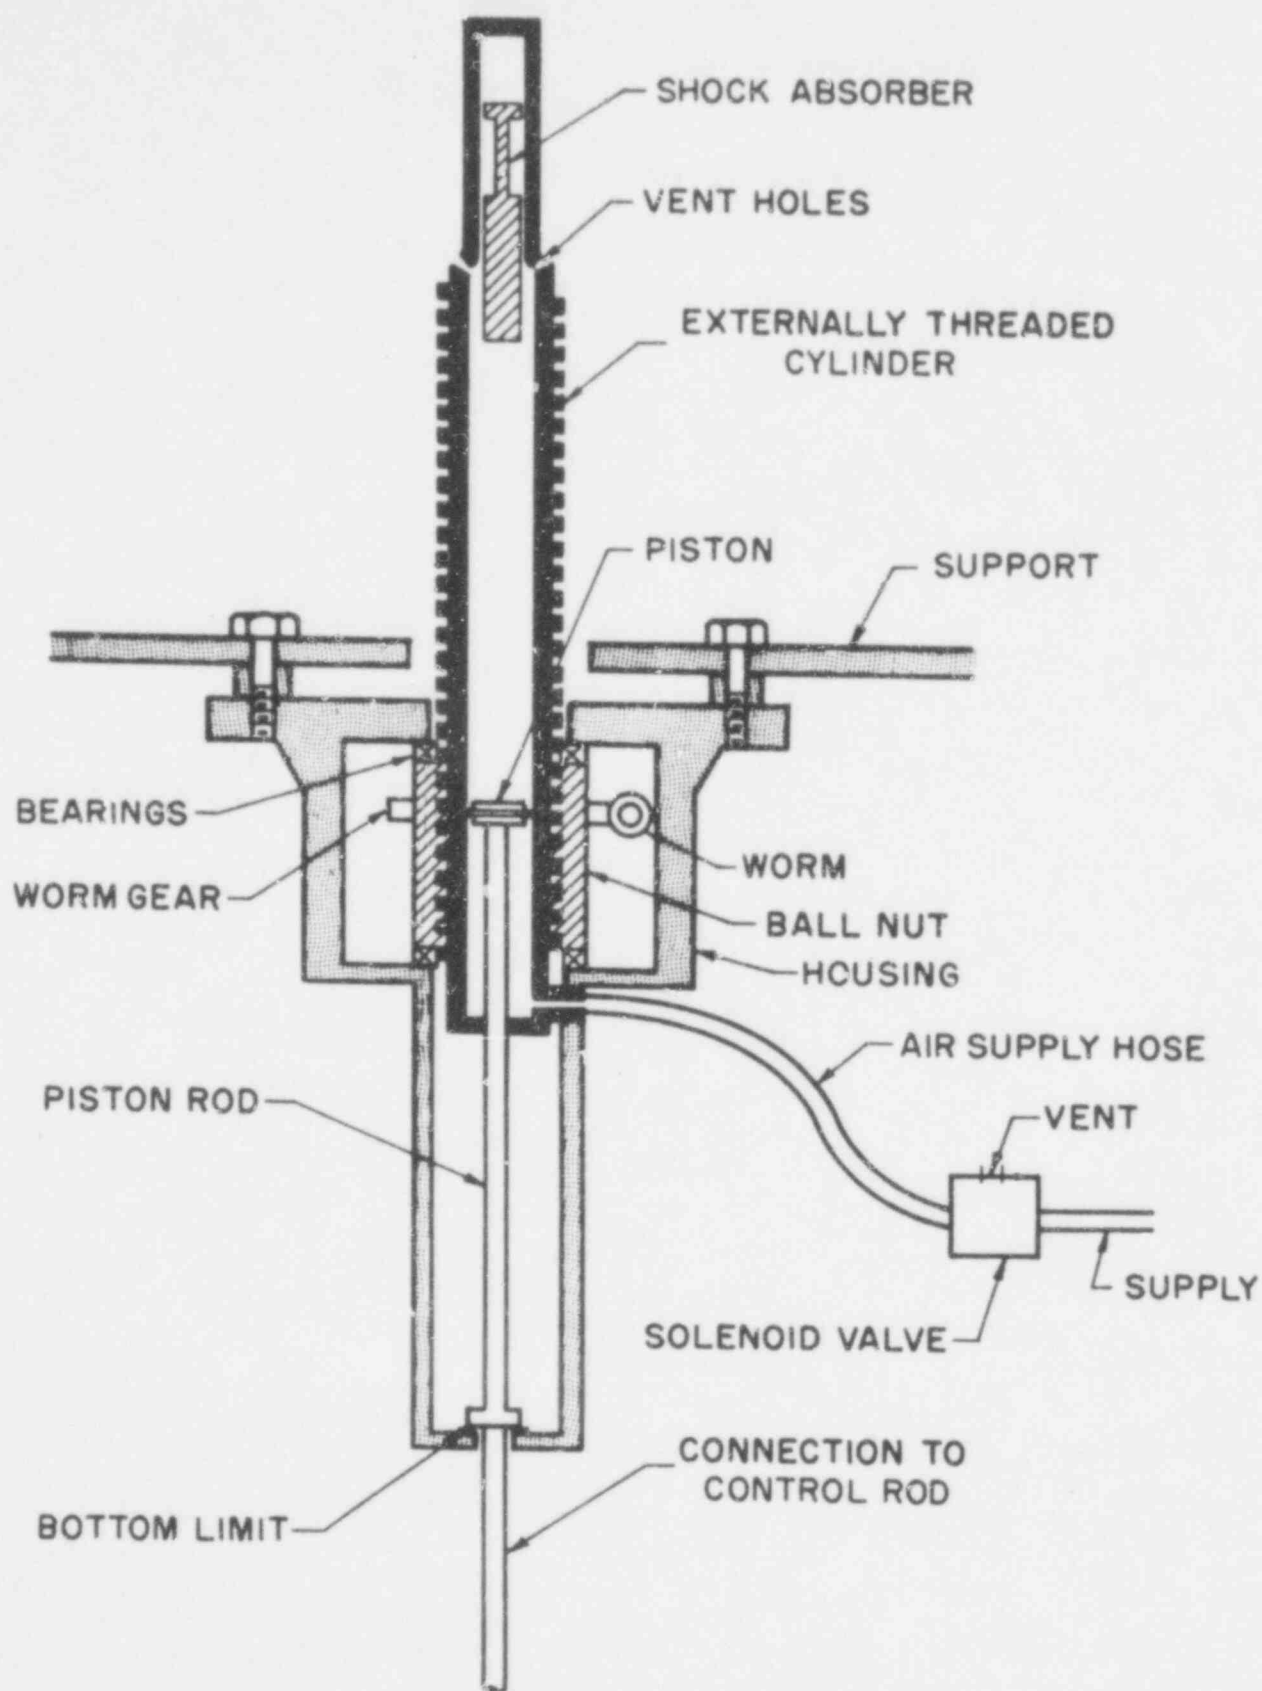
SCHEMATIC DRAWING OF TRANSIENT-ROD DRIVE
